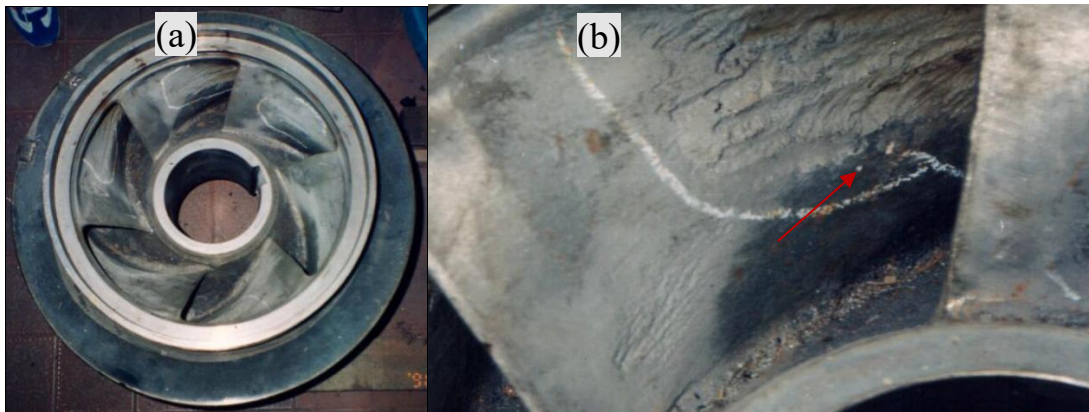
(a) Water pump impeller made of AISI 316 stainless steel (b) cavitation damage in impeller vane.
